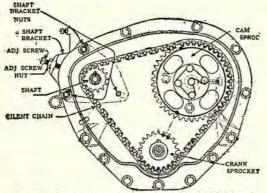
Cam-shaft gear on the Studebaker "EJ" driven by a silent chain. Note that the chain has an exterior adjustment.
